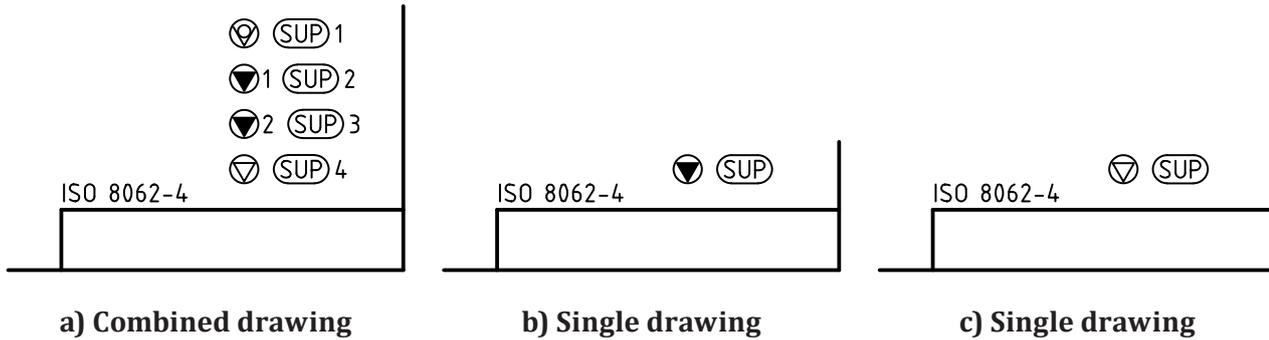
Example of SUP indication used together with the product definition type indicator near the drawing title block
